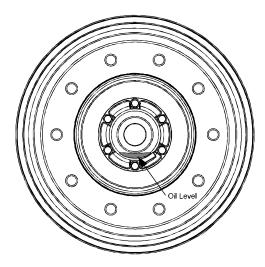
Wheel Bearing Oil Level with Suspension at Ride Height
